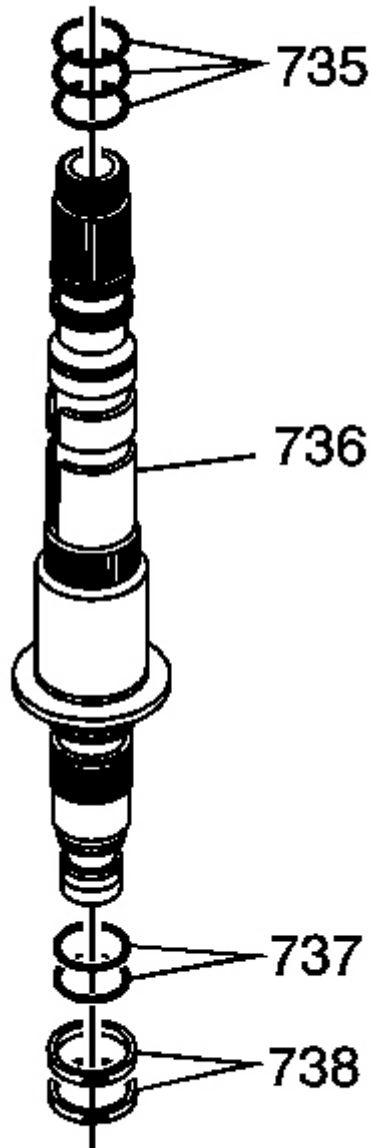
1st/2nd Clutch Shaft Fluid Passage Seals Removed
